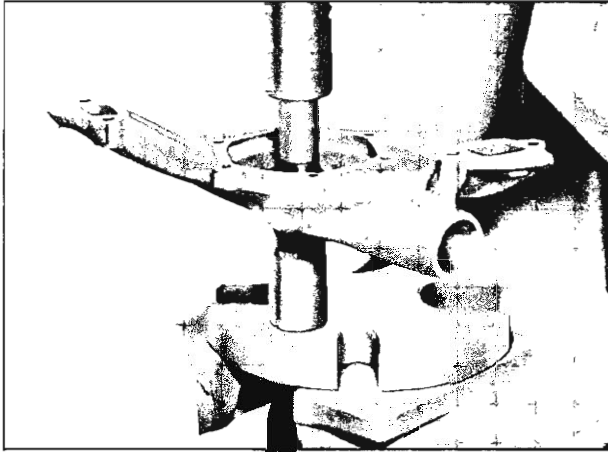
Installing Shaft and Bearing Assembly (348 Cu. In. Pump)
